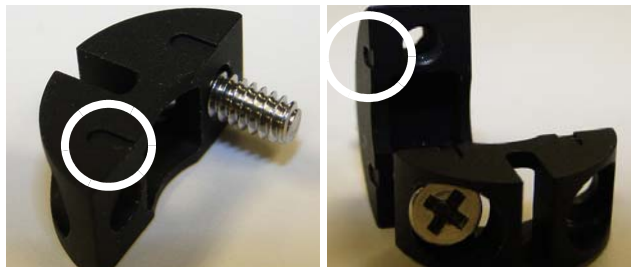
8. Notched Wheel Half with Screw Inserted
